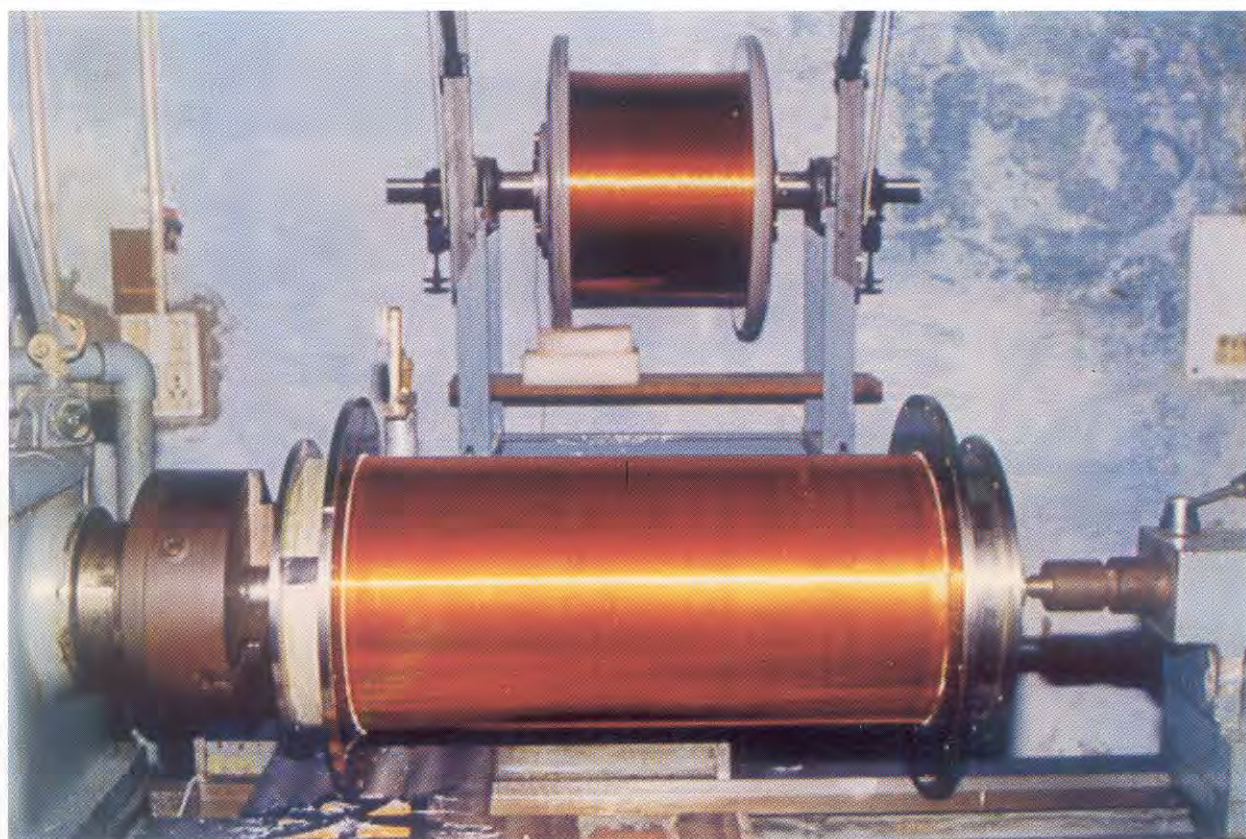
A large bore (255 mm) SC magnet being wound using a Cu/Nb-Ti wire of dia. 0.56 mm. The overall dimension of the magnet is 400 mm X 680 mm.
